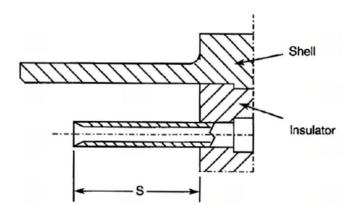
CONTACT POSITIONS FIGURE 2.5.1 - MOUNTING CONDITION
